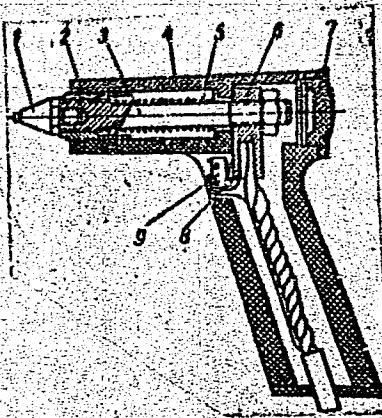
Hand torch for welding assembly spot. 1 - electrode, 3 - coupling rod,
